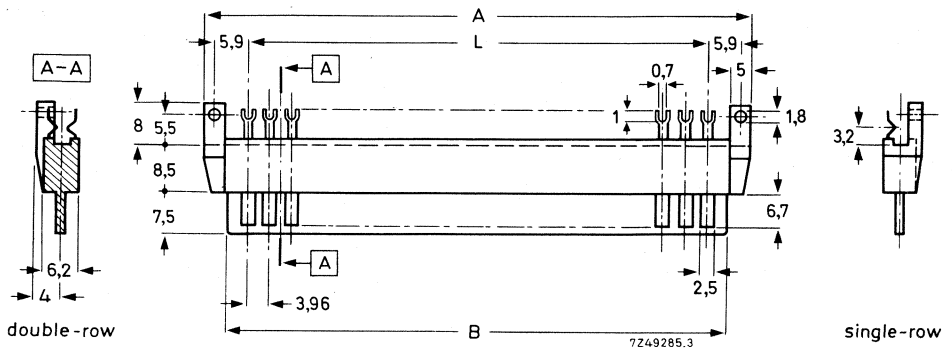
Printed-wiring interconnector; see Table 2 for dimensions A, B and L.
